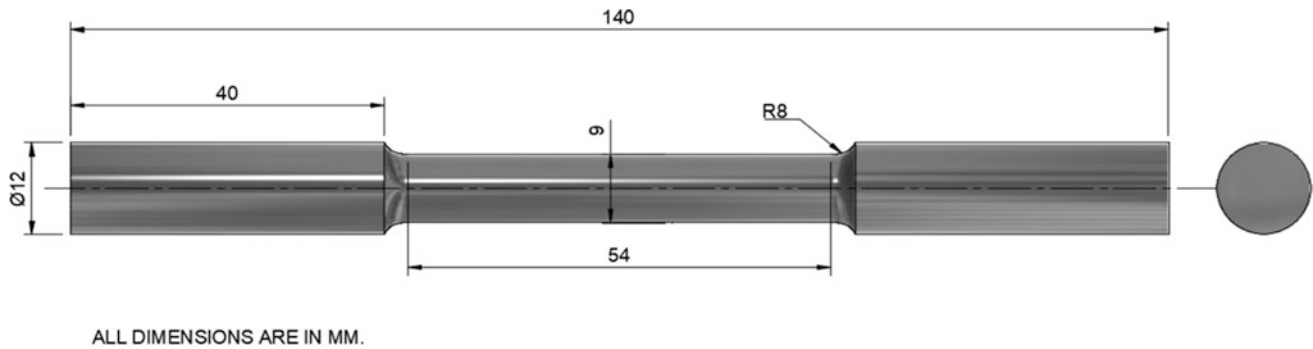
Dimensions used for tensile test specimens of AA6063-T6
